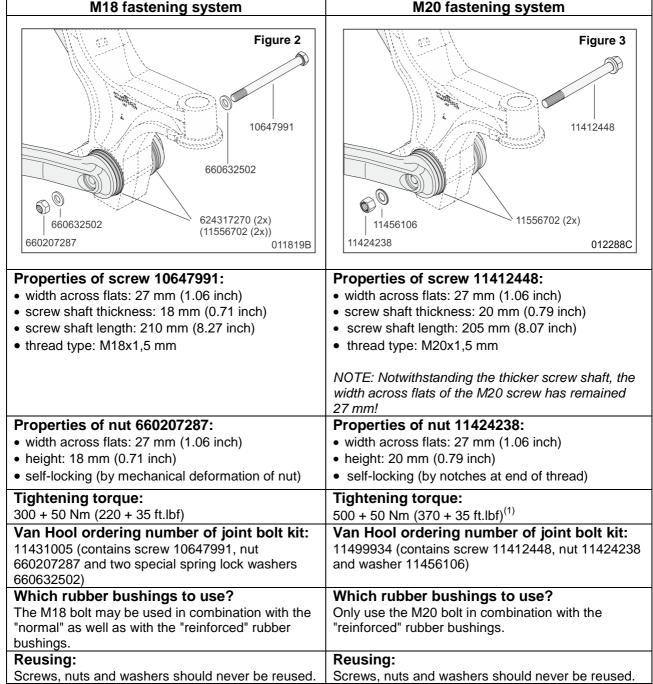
Fastening of wheel-suspension arm joints (figure shows front-wheel suspension)
